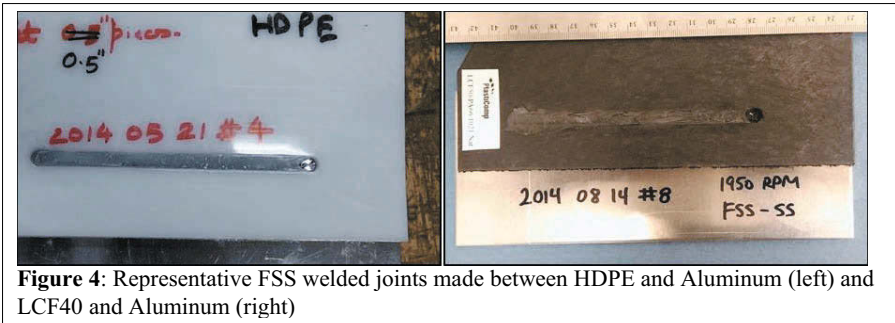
Representative FSS welded joints made between HDPE and Aluminum (left) and LCF40 and Aluminum (right)
